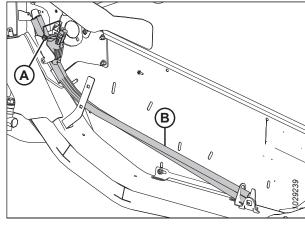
Divider Rods in Storage Location at Right Header Endsheet
